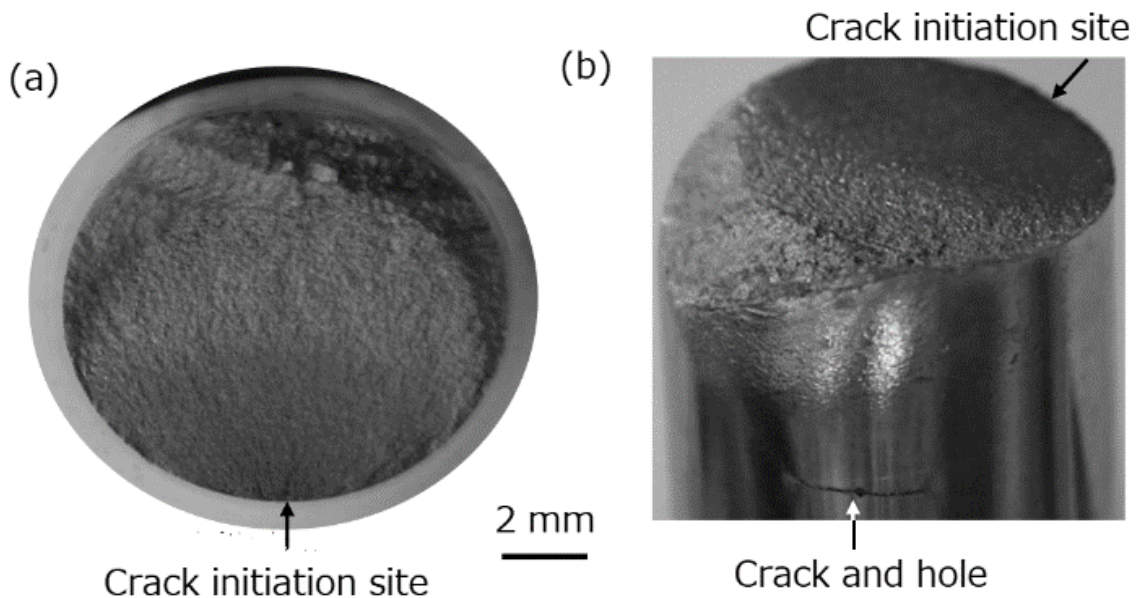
Observation of fracture surface of holed specimen when specimen broken from another part of hole ($\sigma_a = 180$ MPa); (a) Top view, (b) View from inclined direction.
